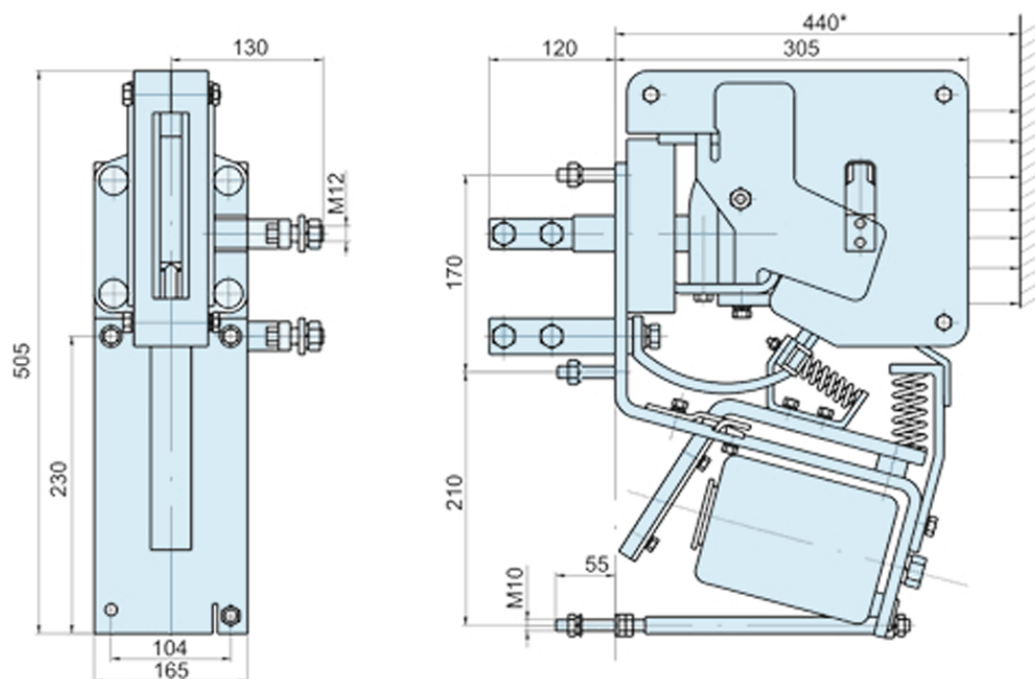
Assembly drawing of KIIB-600 electromagnetic DC contactor [49]
